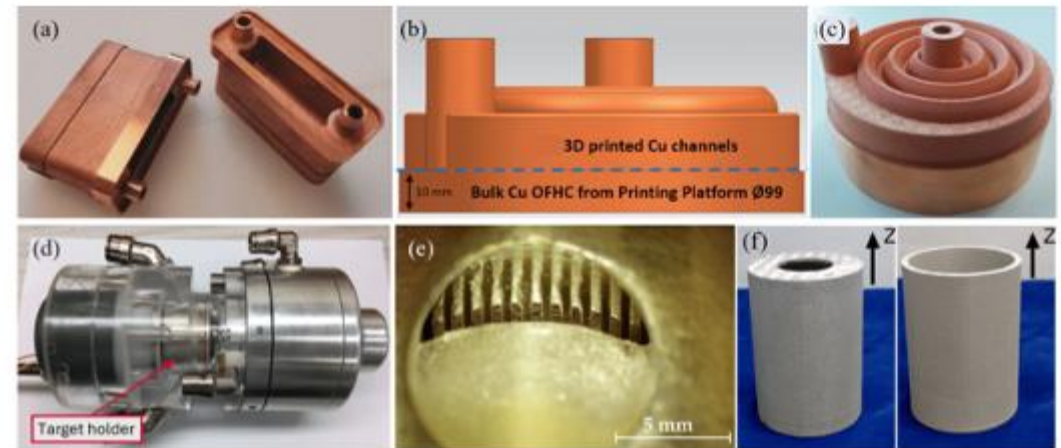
(a) Additively manufactured crotch absorbers, (b) CAD design and (c) photograph of copper beam dump made by PBF-LB/M [224], (d) photograph of target assembly of the IBA Cyclone<sup>®</sup> 18/18 cyclotron with (e) detail of the internal cooling system of the additively manufactured target holder [227], and (f) cylindrical magnetic shielding structures made by PBF-LB/M [149].
